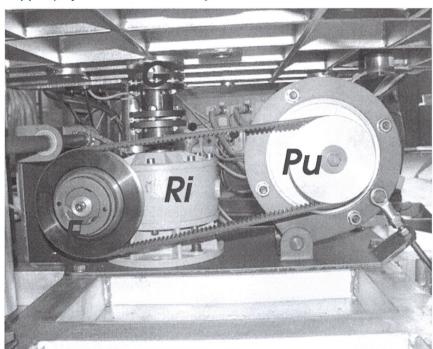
Motor with pulley and reduction gear secured to the machine base.
